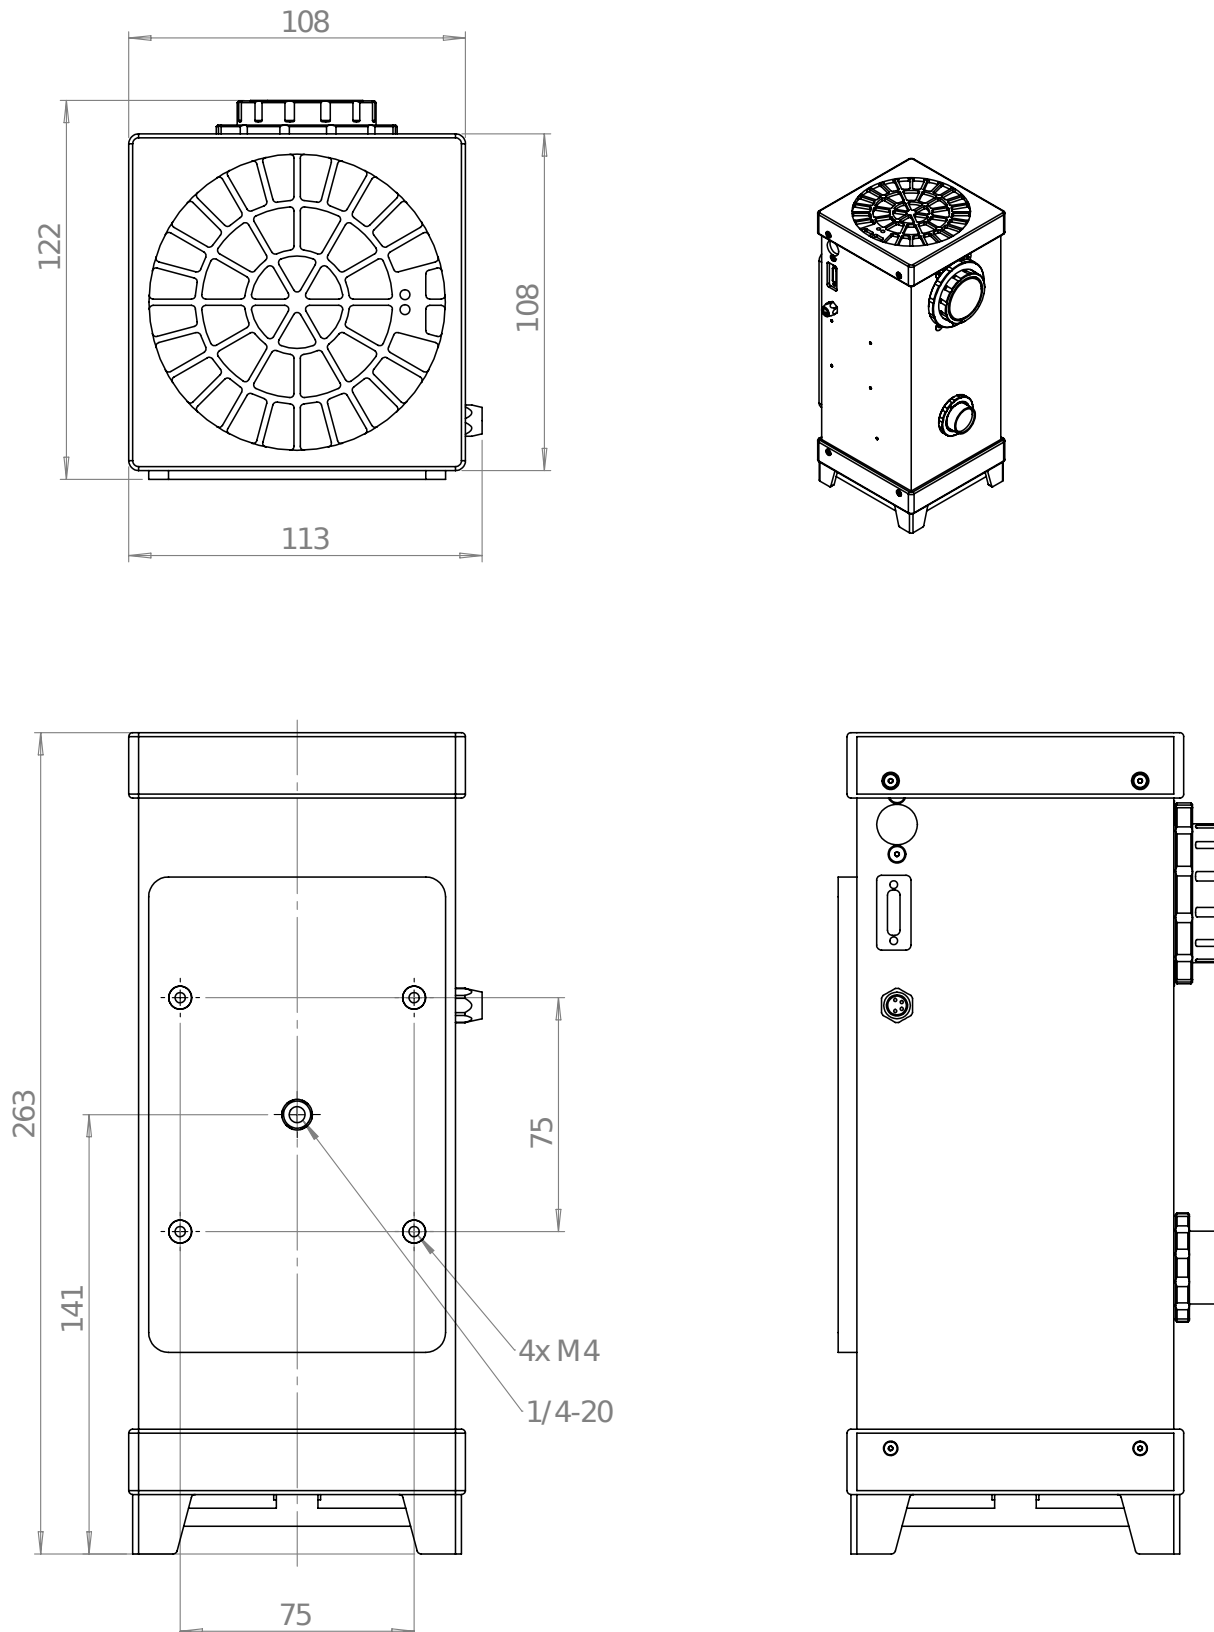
Mechanical dimensions of the Depthscan and the positions of its mounting holes. All measurements are in millimetres (mm).
